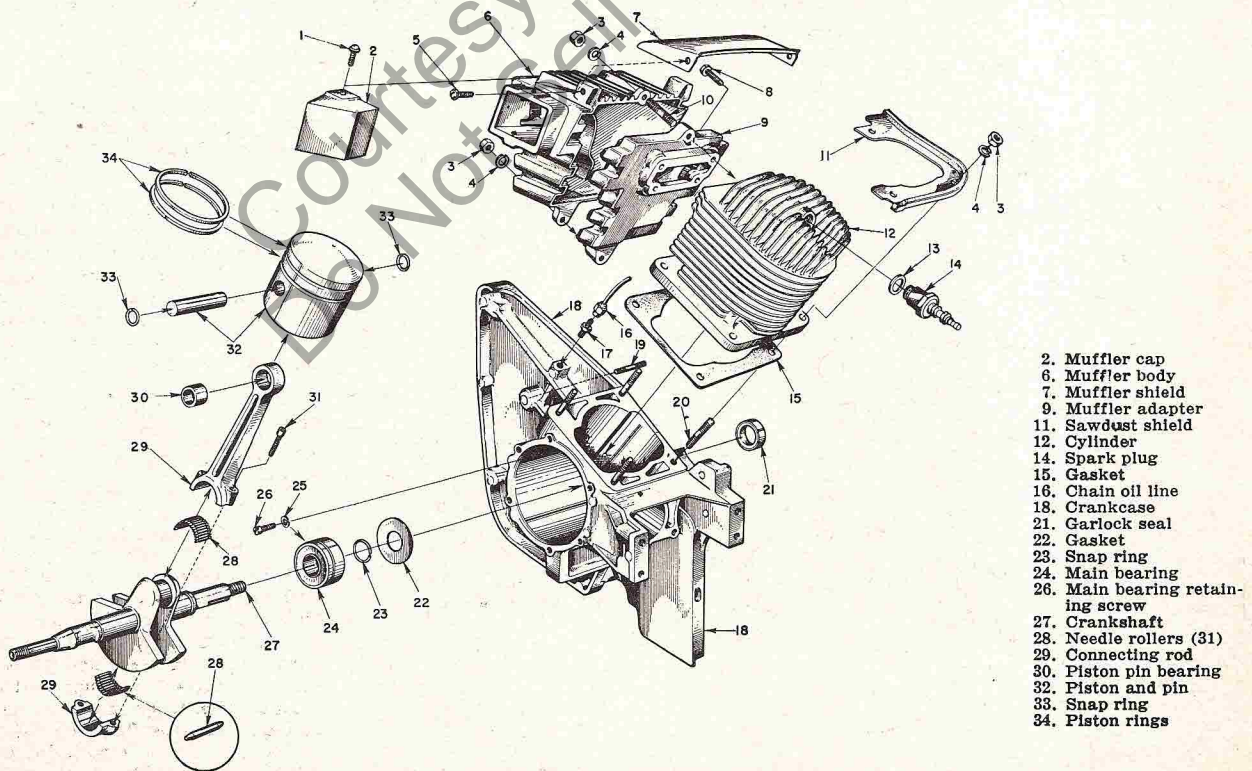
Exploded view of 900D chain saw engine. Others in series are similar.
